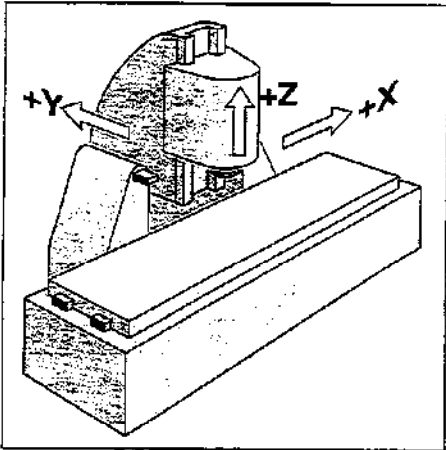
On this machine the tool moves in the Y and Z axes, and the table moves in the +X' axis.
